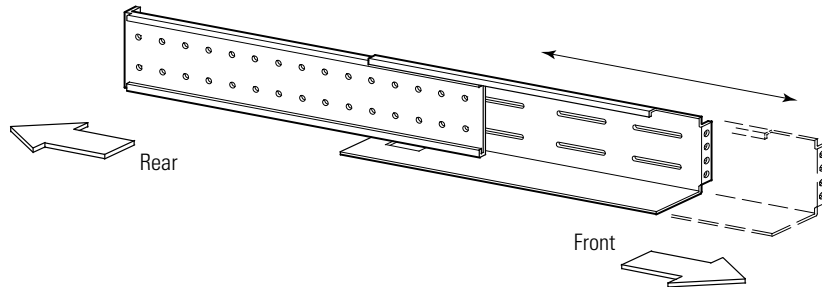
Adjusting the Rail Depth (Right Rail Assembly Shown)
